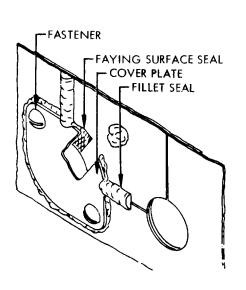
DETAIL B ASSEMBLY OF BULKHEAD FITTING
